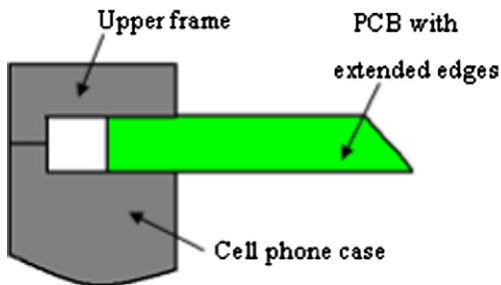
PCB with extended edges clamped by upper frame and cell phone case.
